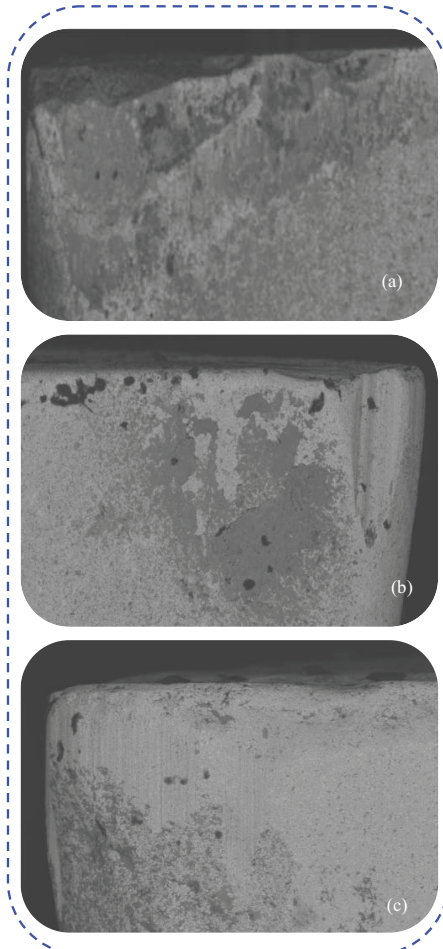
Cutting tool flank wear topography for three type of cooling techniques (a) DAC, (b) flood cooling and (c) MQCF.
